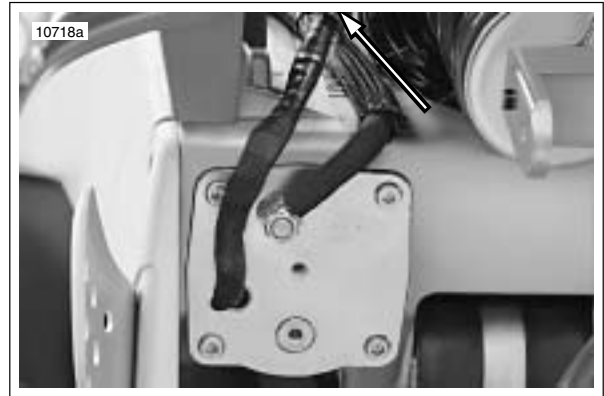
Fuel Pump connector [86] (swingarm removed for illustration)
